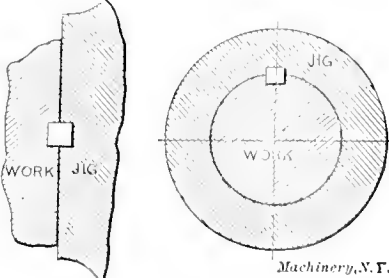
Expansion Bushing used for Locating and Clamping Work.
